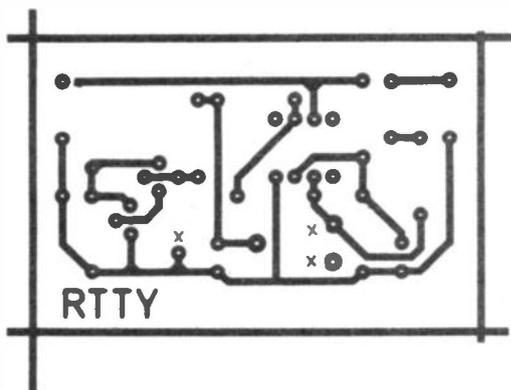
Printed circuit board, foil side. Holes marked 'X' are 1.5mm (1/16in). Remainder are 1mm
